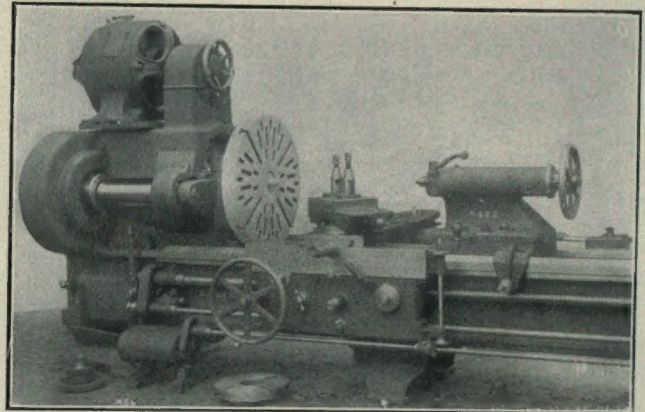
Bertram Interchangeable Lathe Fitted for Motor Drive.
